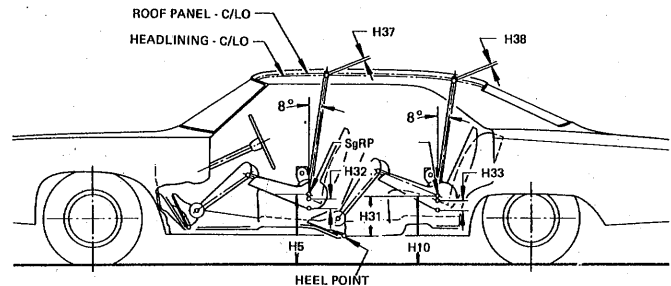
INTERIOR DIMENSIONS, HEIGHT
